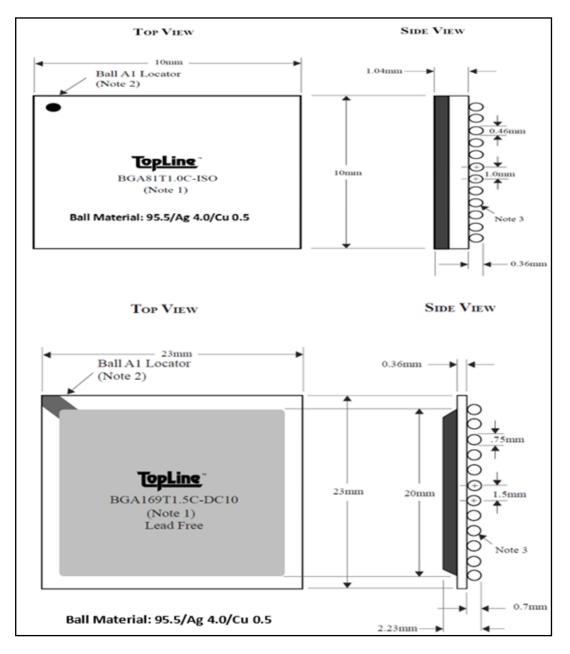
Design configurations of BGA81 & 169 top and bottom ball view *SOURCE:* [ToplineBGA.com].
